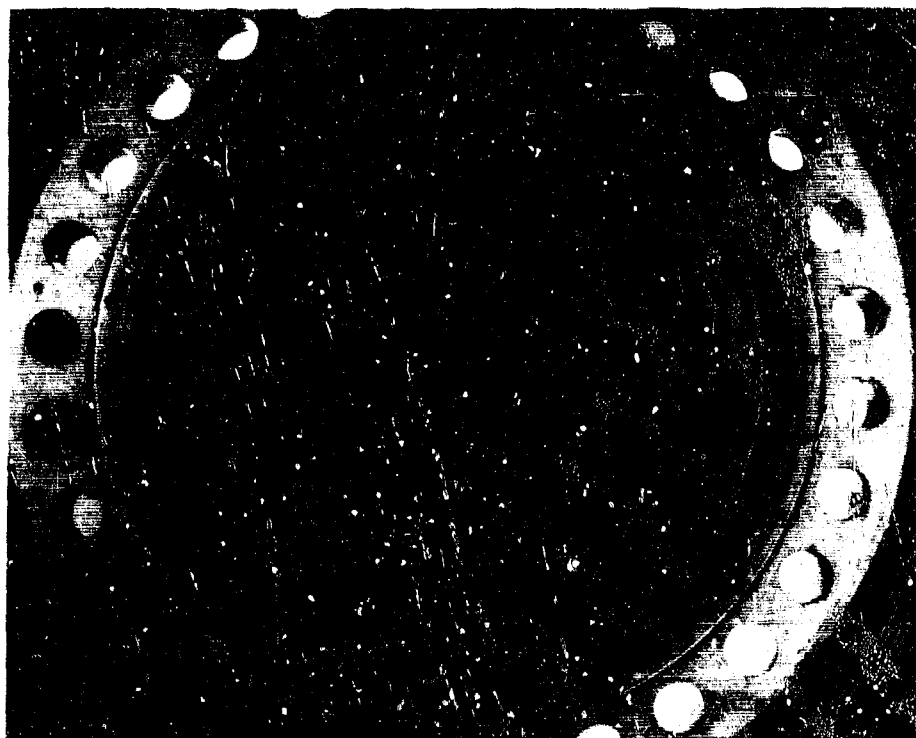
Disassembly View of Preburner Injector Showing Good Condition
